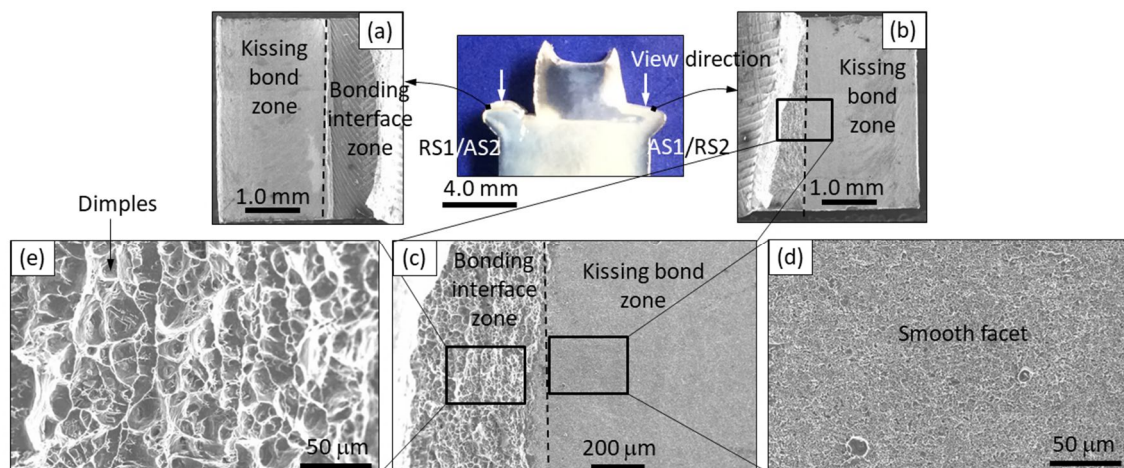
Fracture morphology of specimen produced by offset -0.8 mm.
